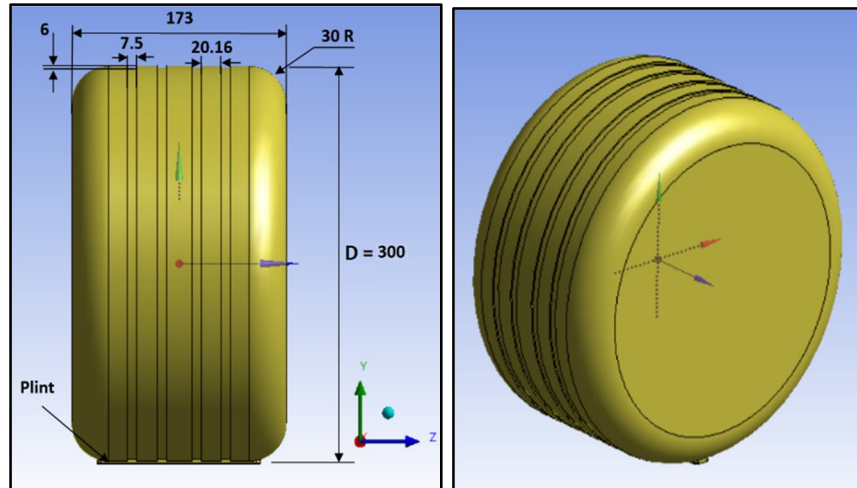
The 3D construction drawing of typical ST wheel (all dimensions in mm).
